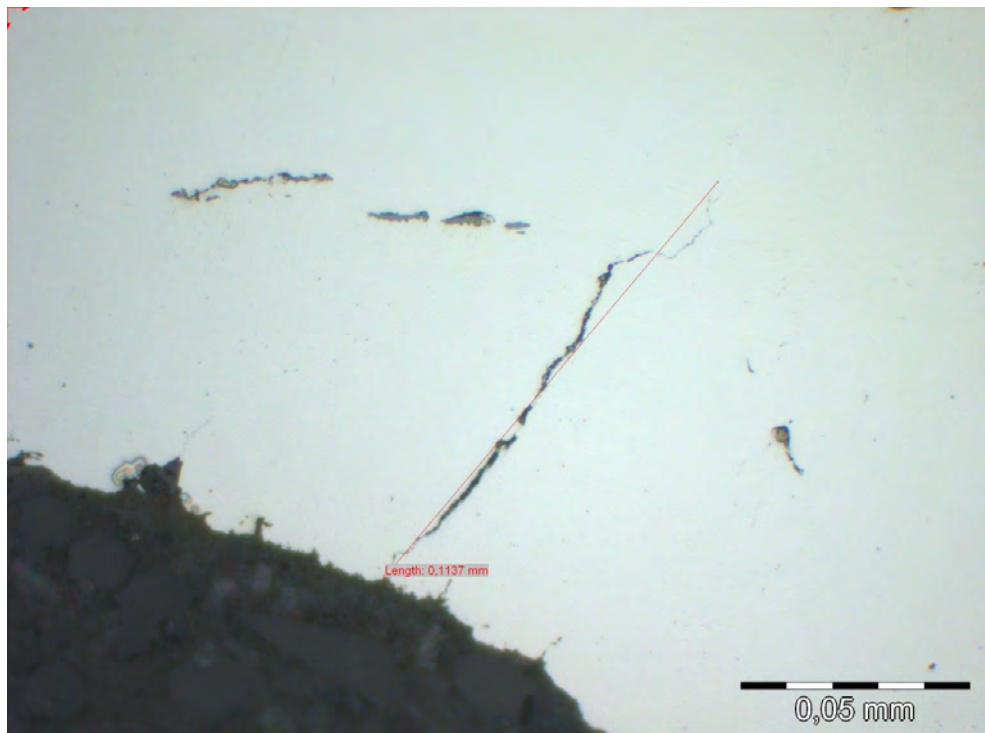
Crack at segment B, fourth ridge on barrel no. SFK 0123-A
